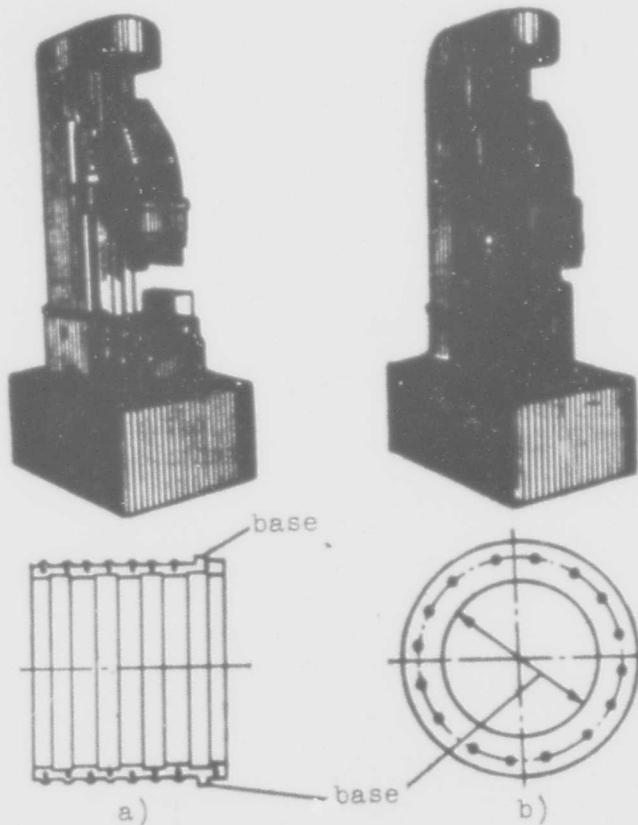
Drilling of holes on multi-spindle drilling machines in front section of compressor housing. a) in bosses in joint plane; b) in flanges.
